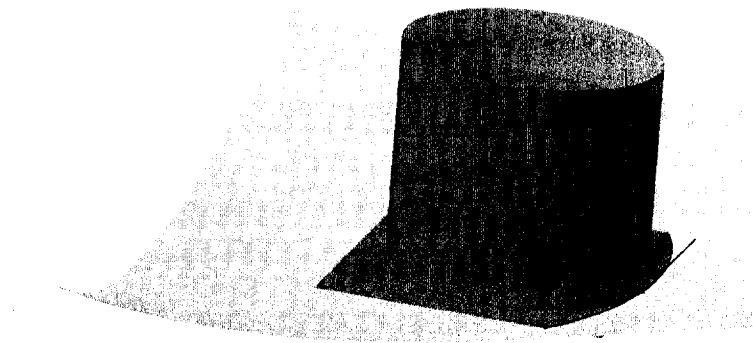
Illustration of sculptured surface machining using a flat end-mill.
